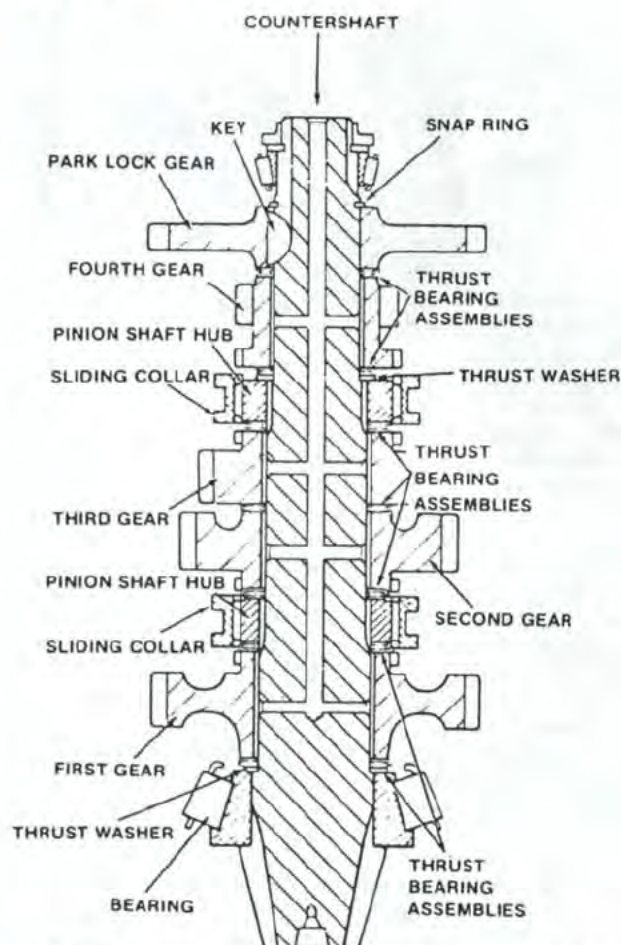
Cross-sectional view of assembled countershaft and related parts.
